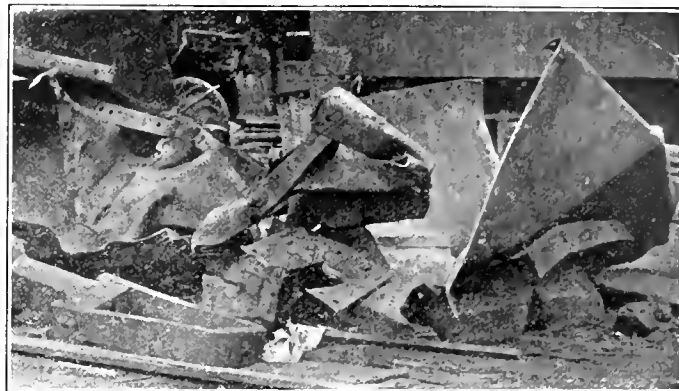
BADLY DAMAGED END SILL AND SHEETS.
